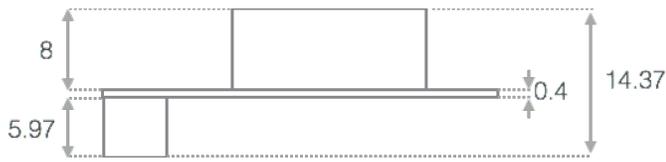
Side view of the FEASTMP module with mechanical dimensions.
